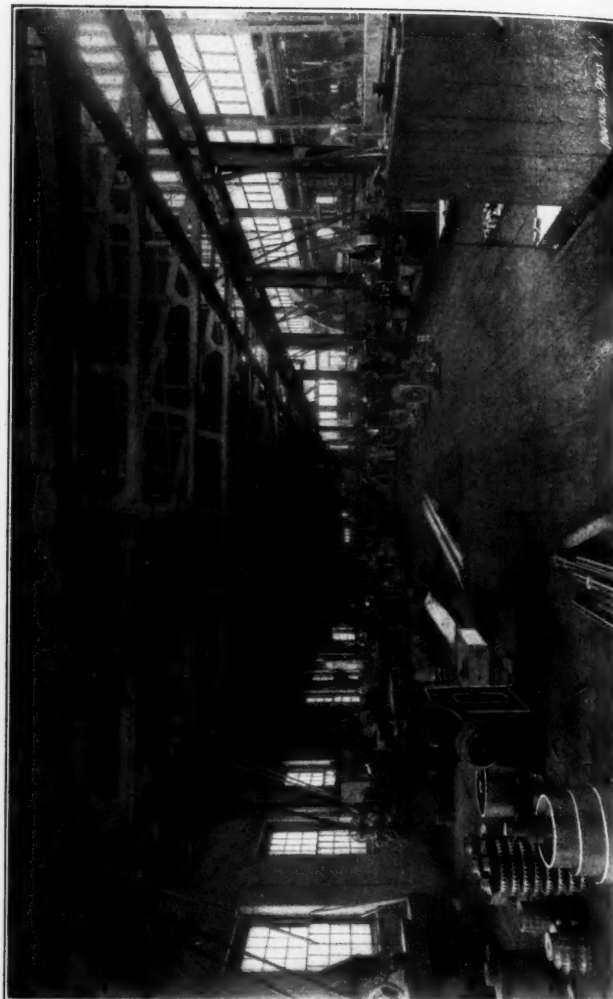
View of Old Machine Shop from opposite end. The Screw Machines are at this end.
